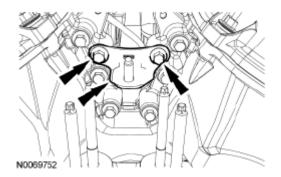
Locating Engine Mount Bracket Bolts Courtesy of FORD MOTOR CO.
